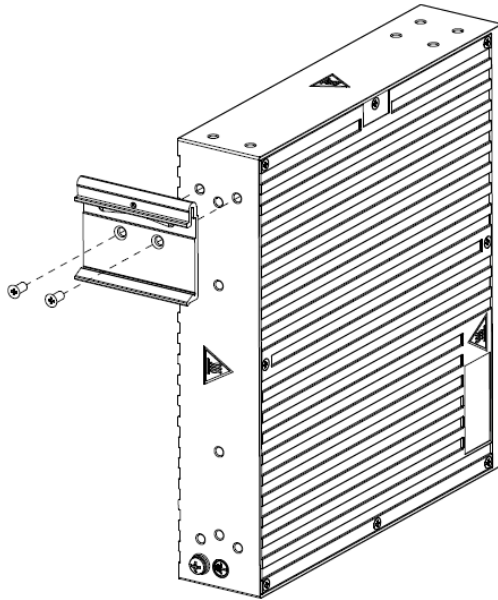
DIN Rail Mounting Option 1: Attach the Bracket
